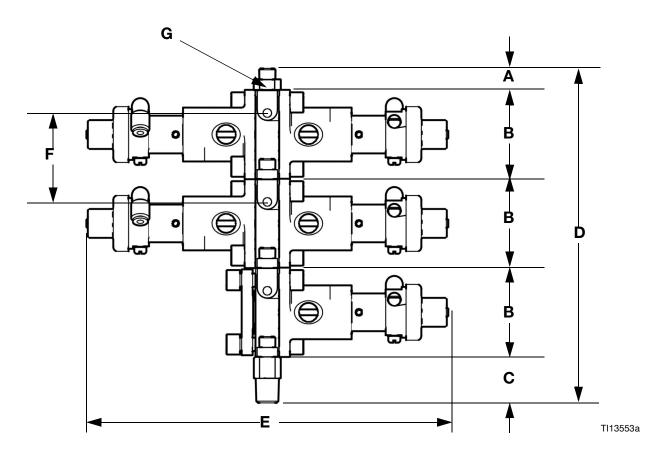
Low Pressure Valve Stack Dimensions - Series A
